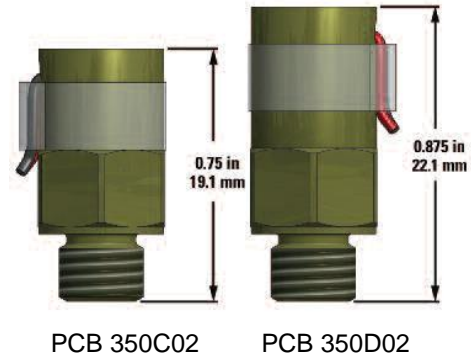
PCB 350C02 and PCB 350D02 Accelerometer Comparisons
